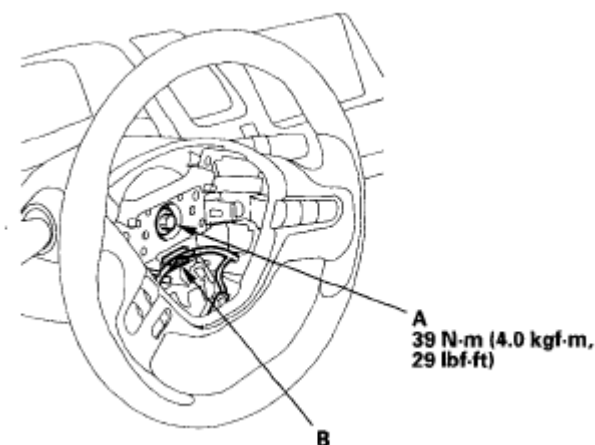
Identifying Steering Wheel Bolt - Specified Torque
